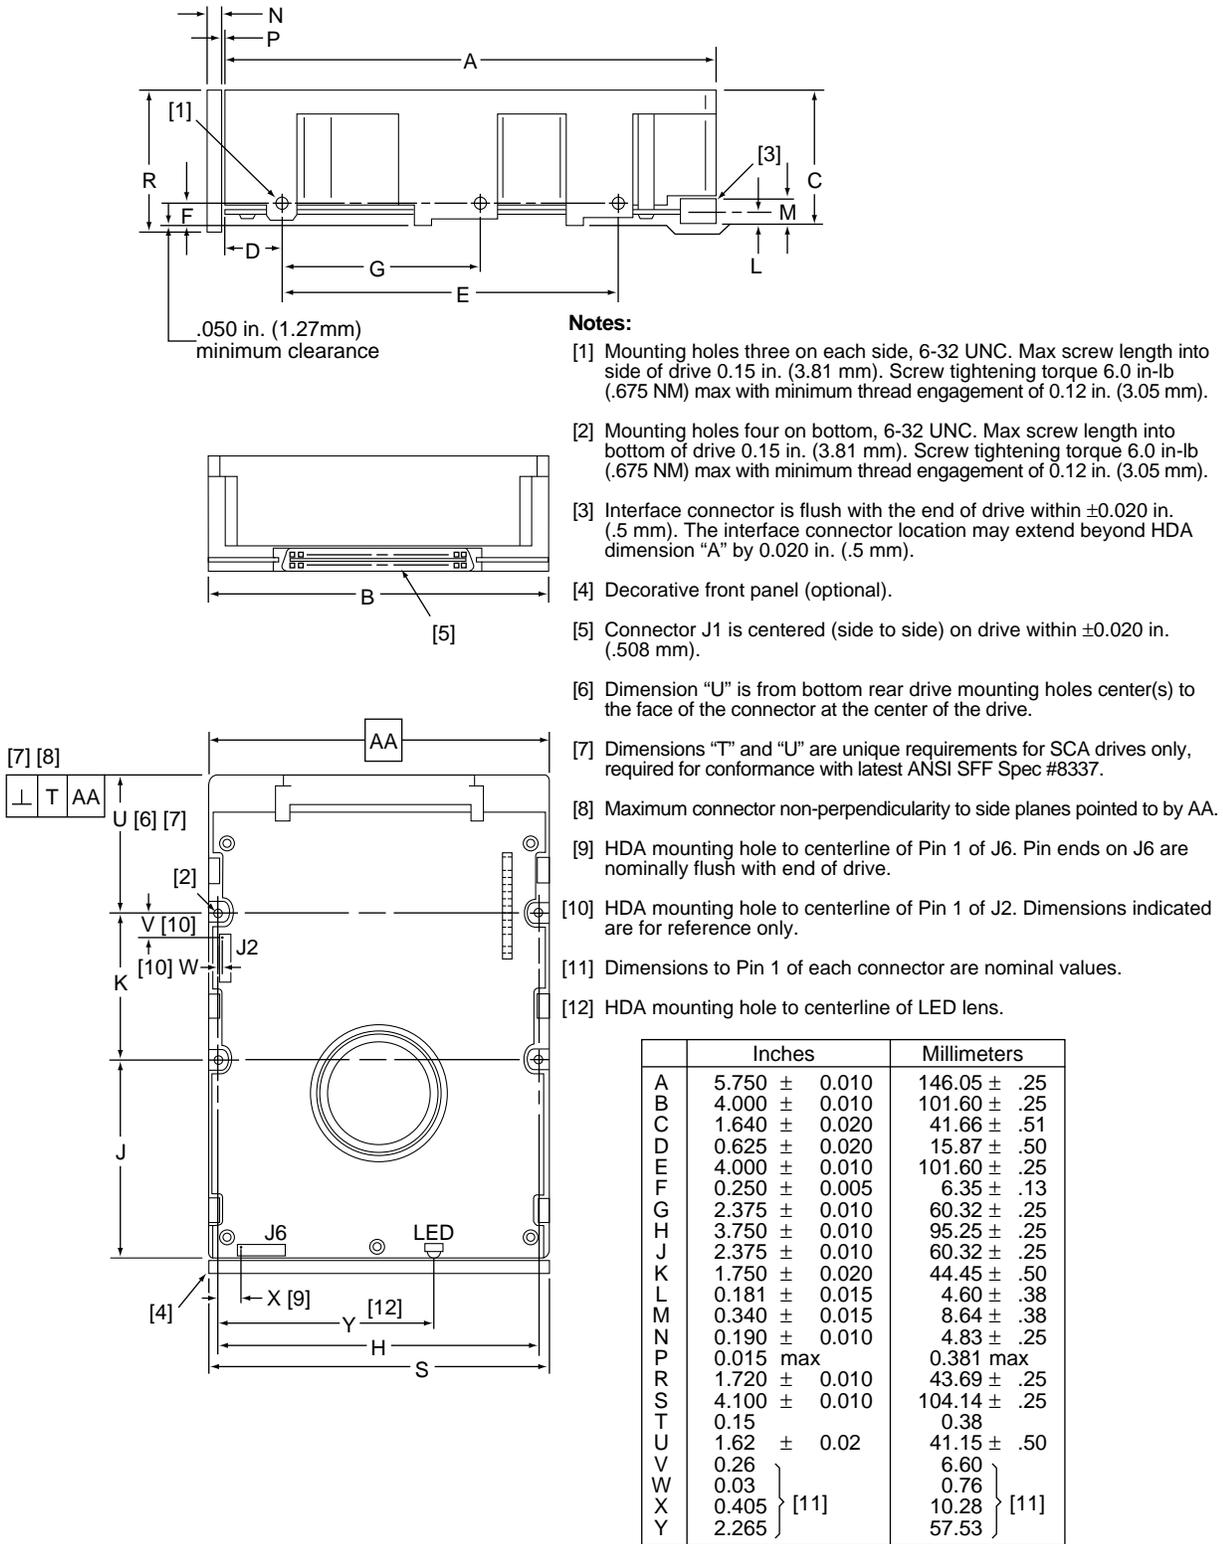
Mounting configuration dimensions for "WC" and "DC" models
